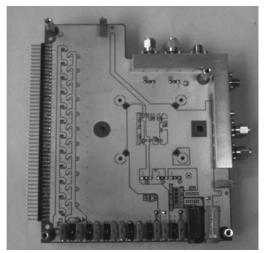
TSEV83102G0B Evaluation Board: Bottom View
